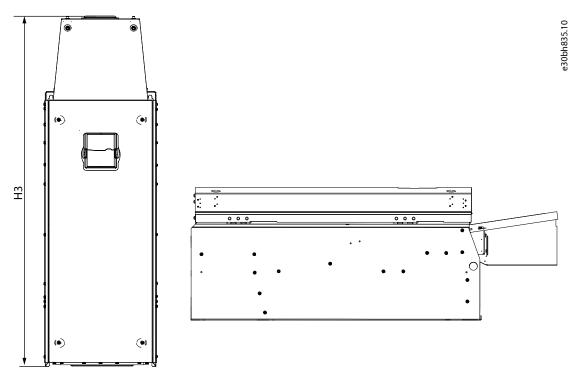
Dimensions of the VACON® NXS/NXP AC Drive, FR8 with DC Connection Extension Box
